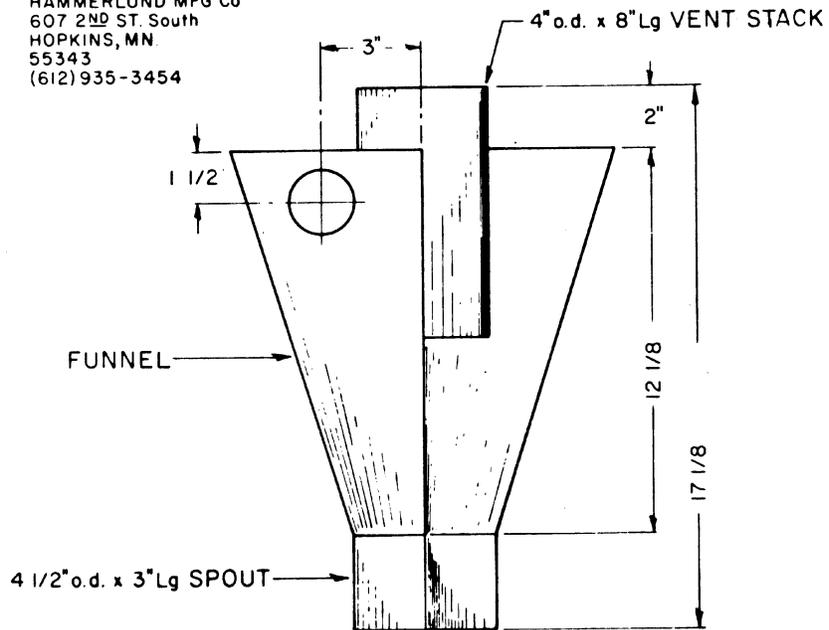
CYCLONE RECEIVER WELDMENT
